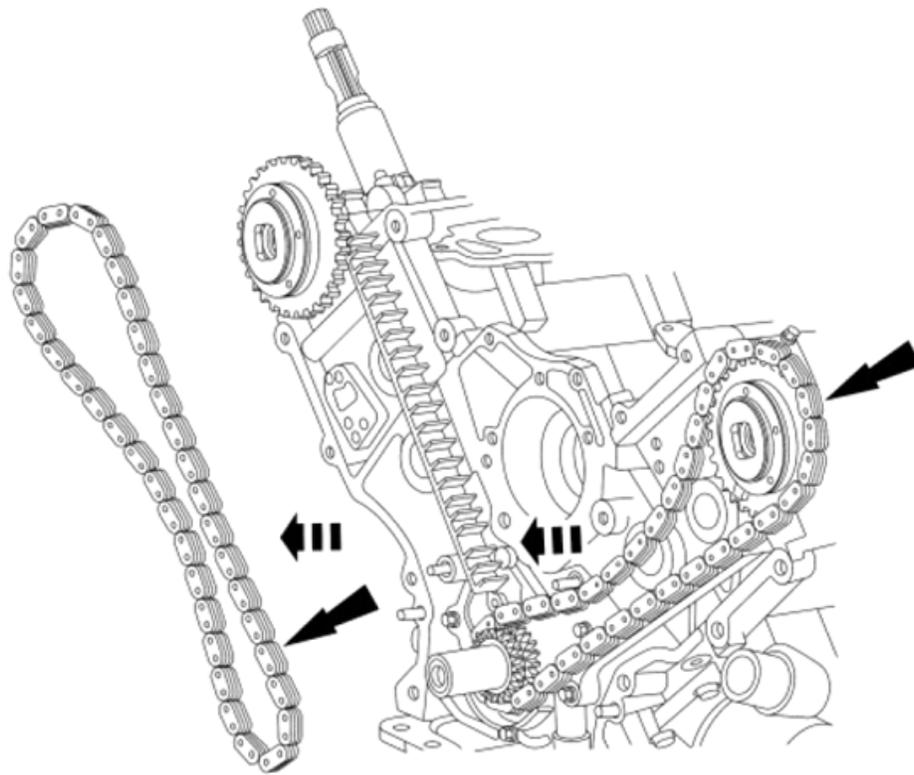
Locating Timing Chains And Crankshaft Sprocket (RH And LH)
